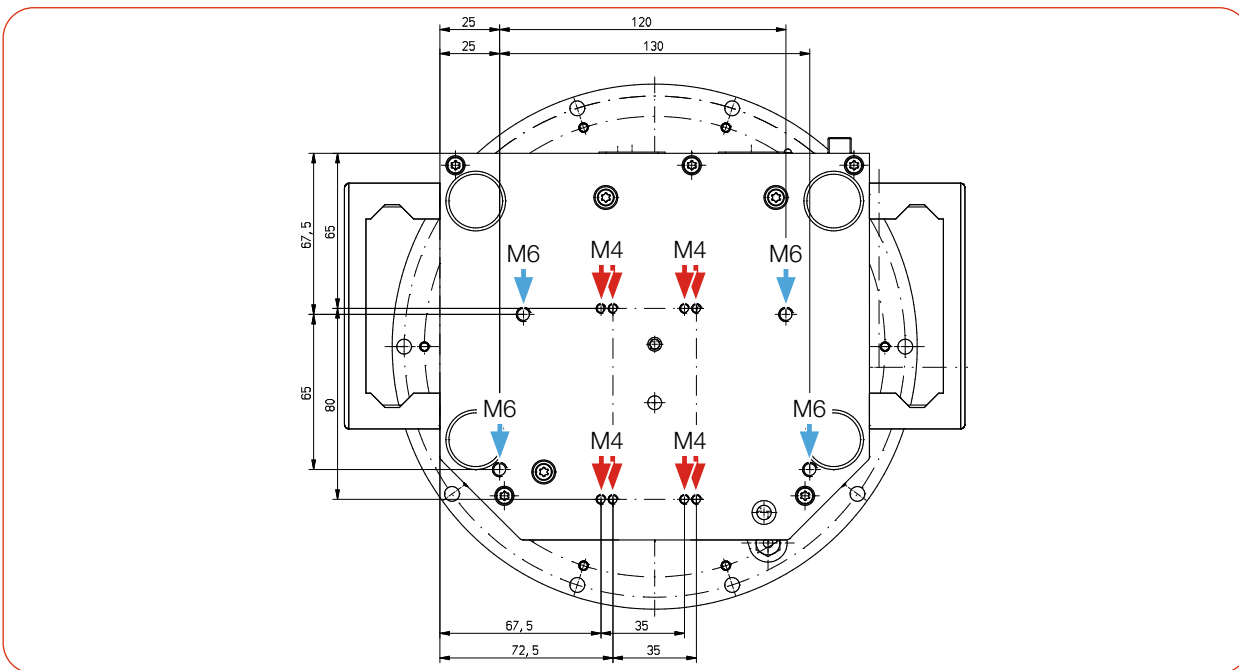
Mounting threads M4 and M6 in the bottom of the housing of the CPM F-30 (dimensions in mm)
